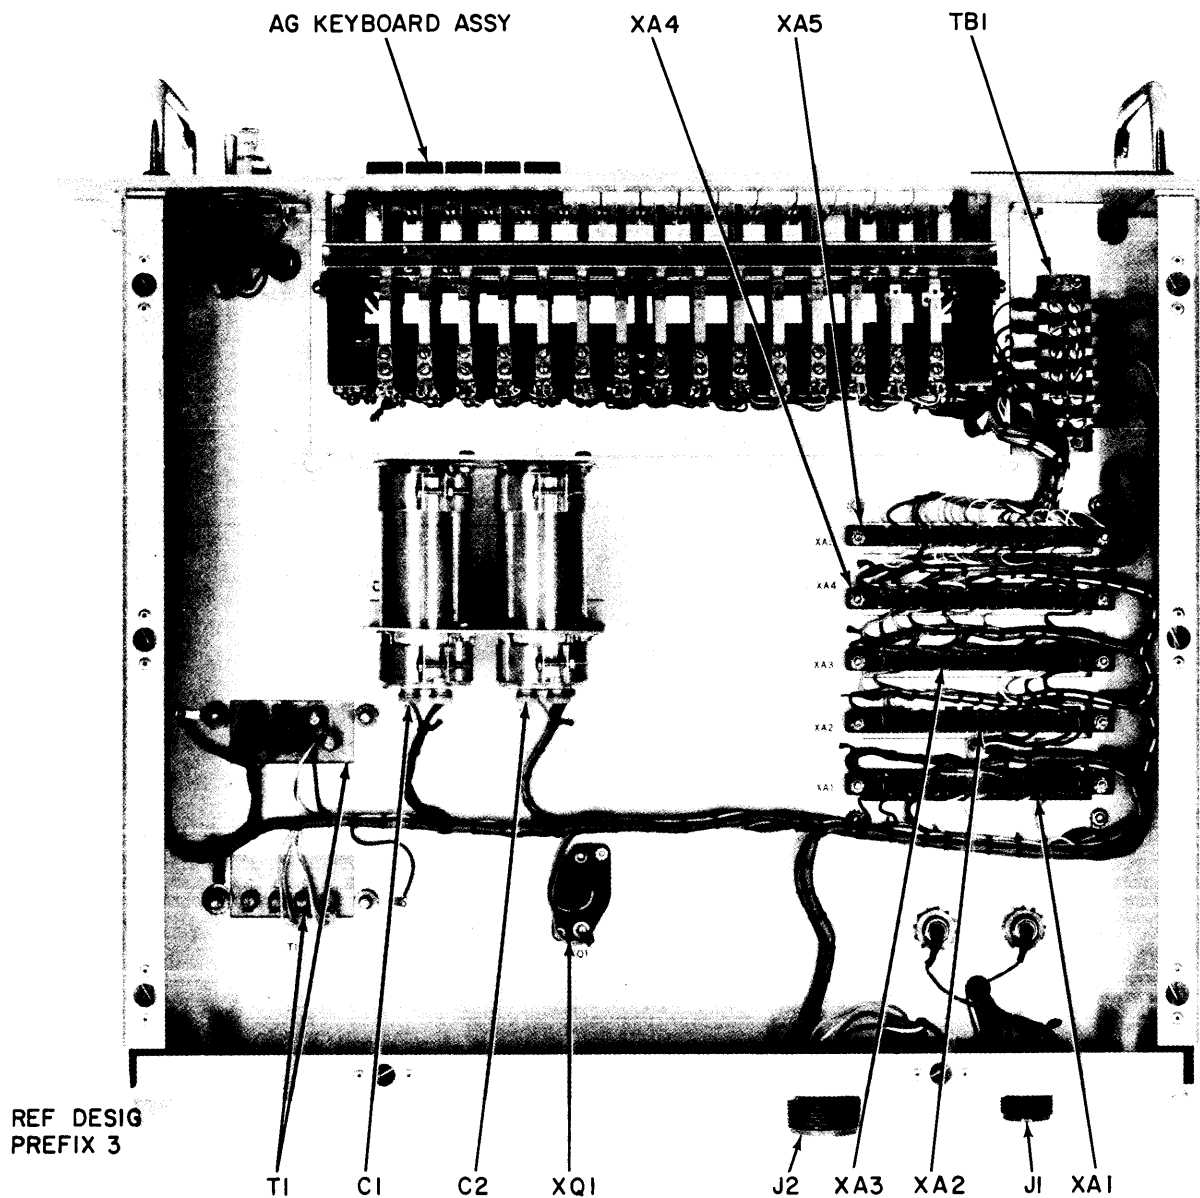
Component Locations, Rear Panel View of Programmer, C-7775/UR
